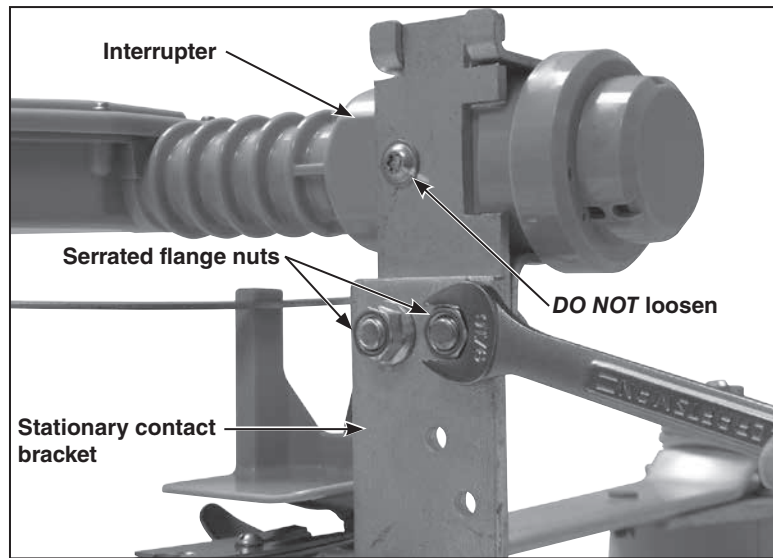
Remove the serrated flange nuts holding the interrupter to the bracket. Remove the interrupter.
